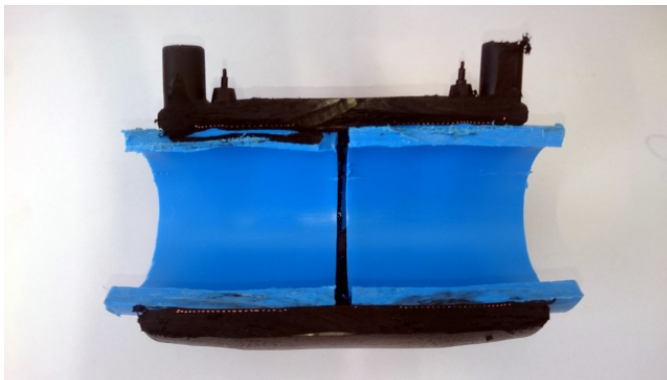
Section across an badly welded electro-fusion joint, the leak location can be seen on the top left where there is incomplete weld of the blue and black PE.
